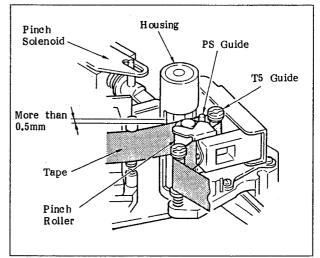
Adjustment of the Position of the PS Guide Assembly (2)
